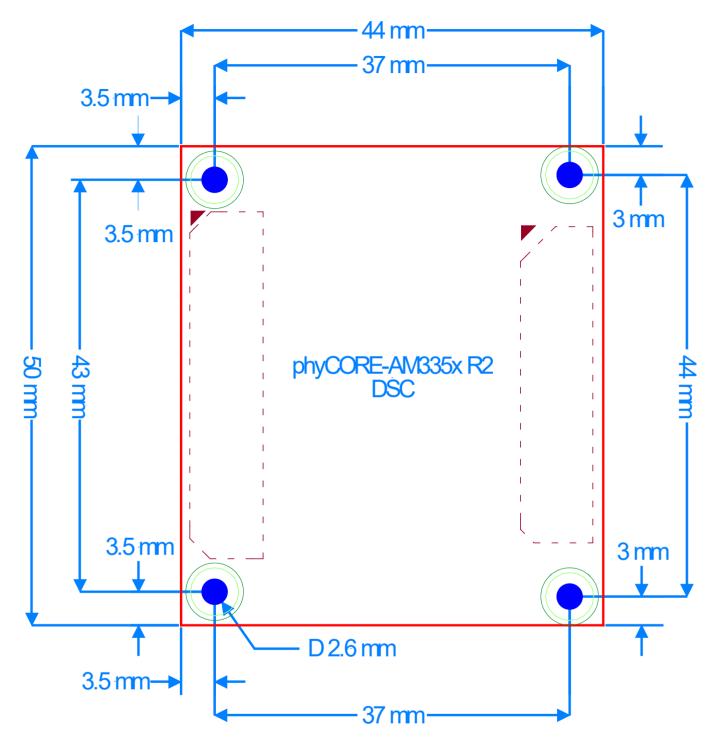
Physical Dimensions phyCORE-AM335x R2 DSC Variant, PCL-060 (top view)
